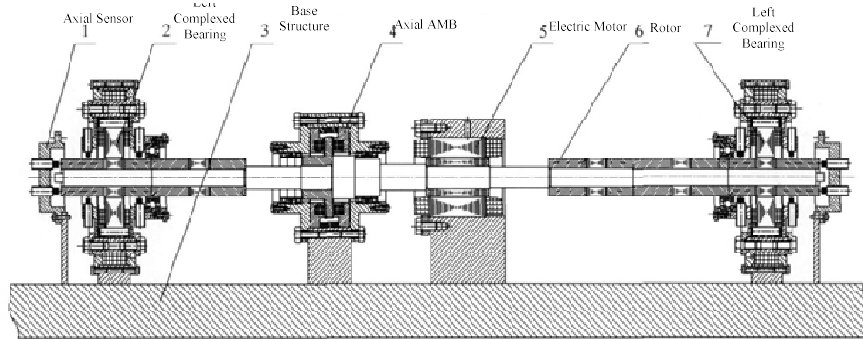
Schematic diagram of Complexed Bearing-rotor system
